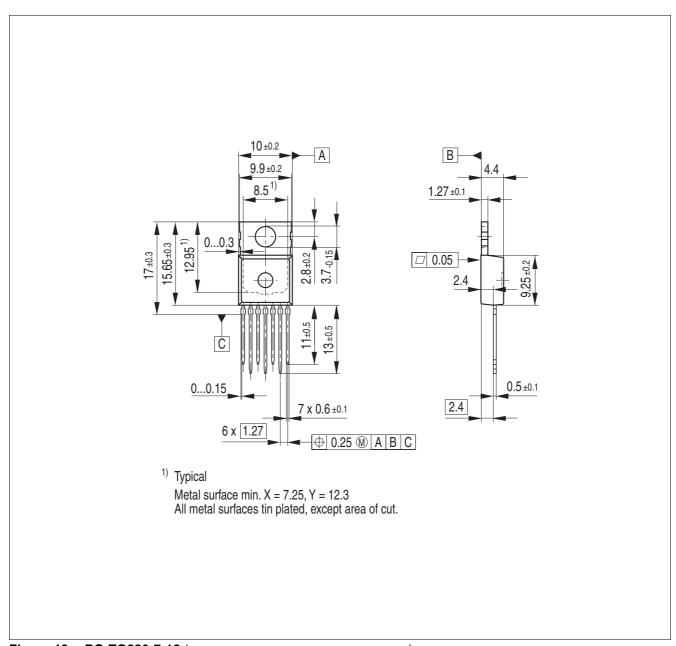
PG-TO220-7-12 (Plastic Transistor Single Outline Package)
